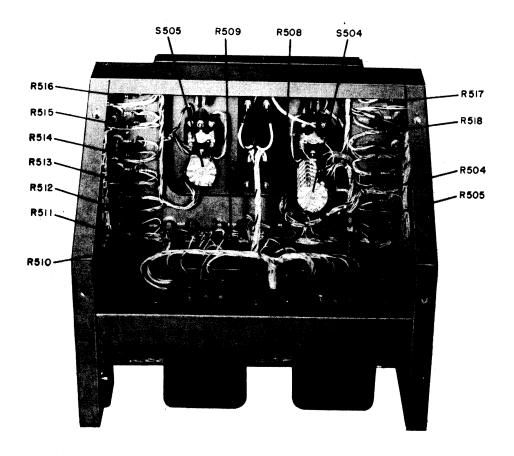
Pow r C ntrol Assembly, Bottom Vi w, Location of Parts
